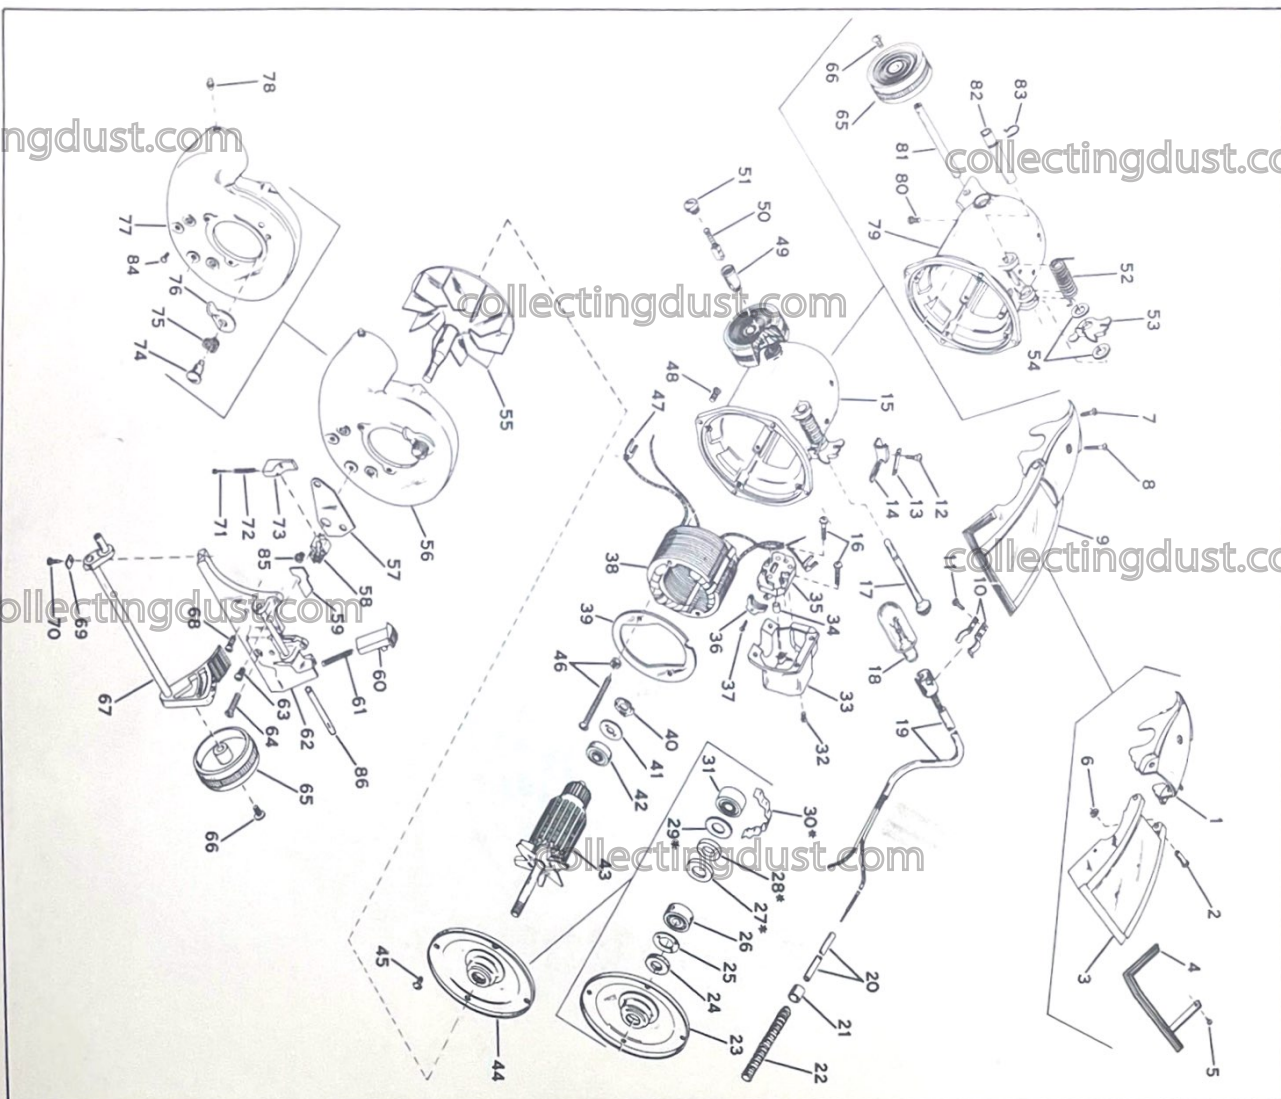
Motor group, exploded view. (Model 505 through 512)
